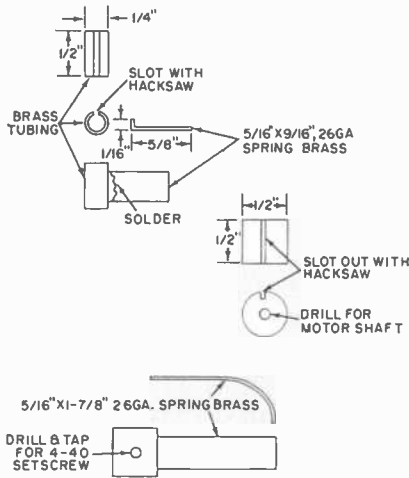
Contacts are made from strips of spring metal soldered to short lengths of tubing. Drill the rotating contact to fit snugly on the motor shaft.
